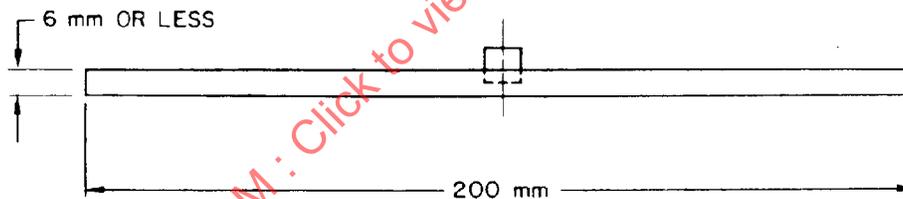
SUGGESTED DESIGN FOR RIGID DISC WITH ACCELEROMETER ASSEMBLY BONDED AT CENTER
